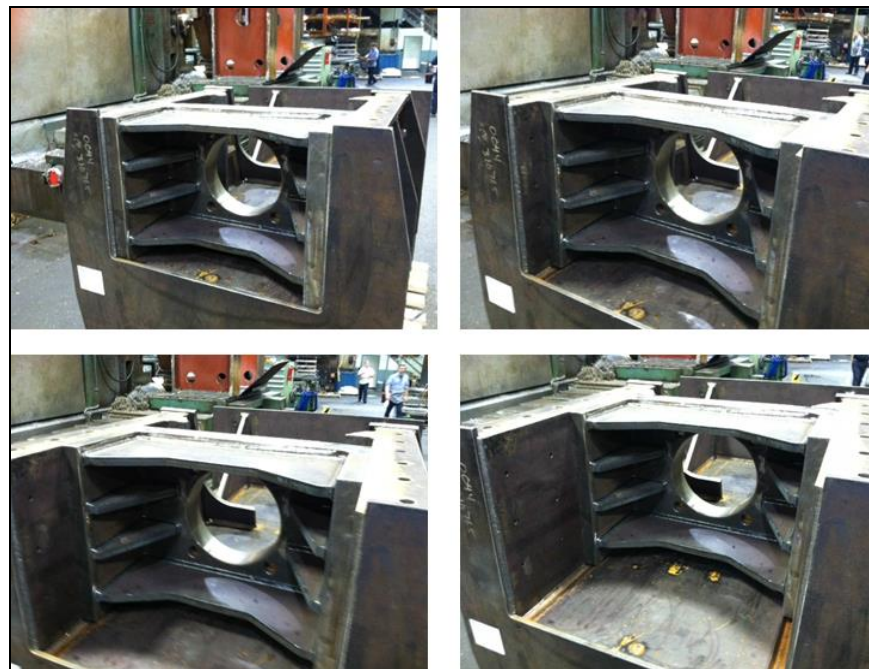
Photographs Showing Push-Back of Sliding Lug After Final Machining of Side Walls
